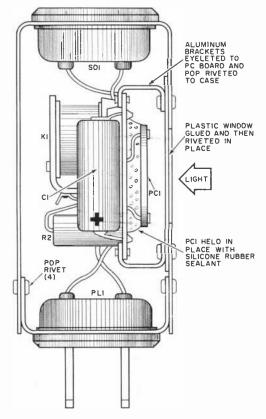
After all the parts are preassembled on the circuit board, and the unit has been fully wired and tested, install the plastic window and pop-rivet the aluminum brackets to the case shield.
